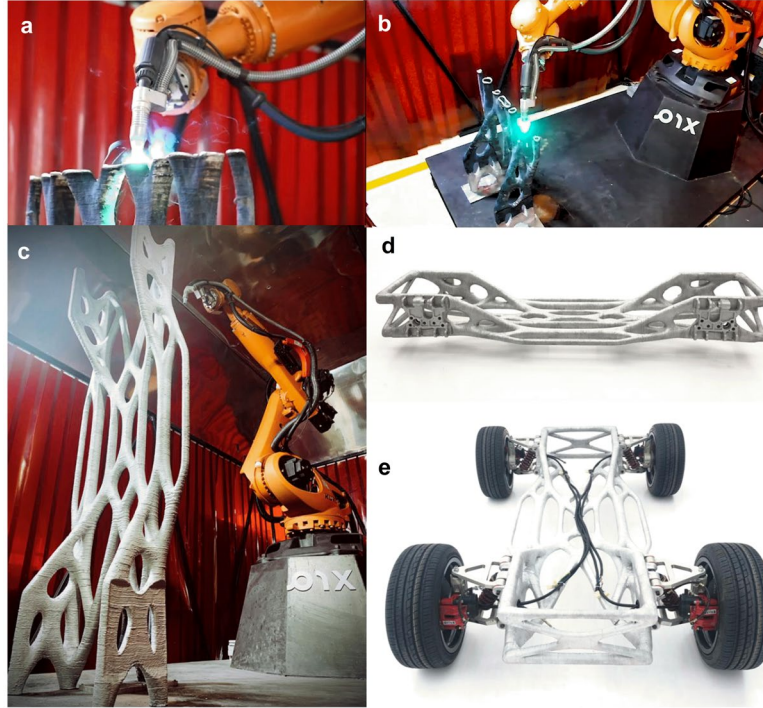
(a), (b) and (c) Manufacturing process; (d) Chassis printing part; (e) Chassis assembly
